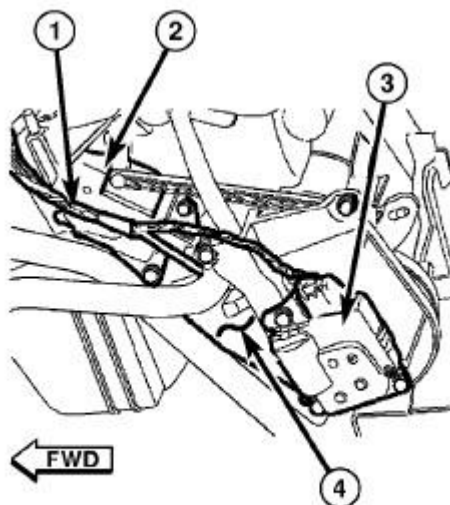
HVAC Wire Harness-Actuators Removal/Installation
